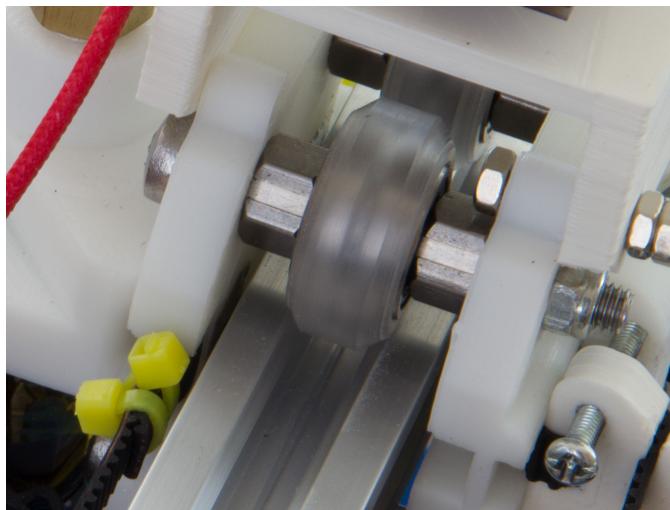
Adjusted v-wheels with notch the same on front and back of each wheel
